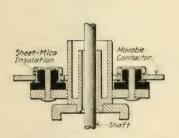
Method of insulating the movable contactor from the operating mechanism. (Hart M/g. Co.)
